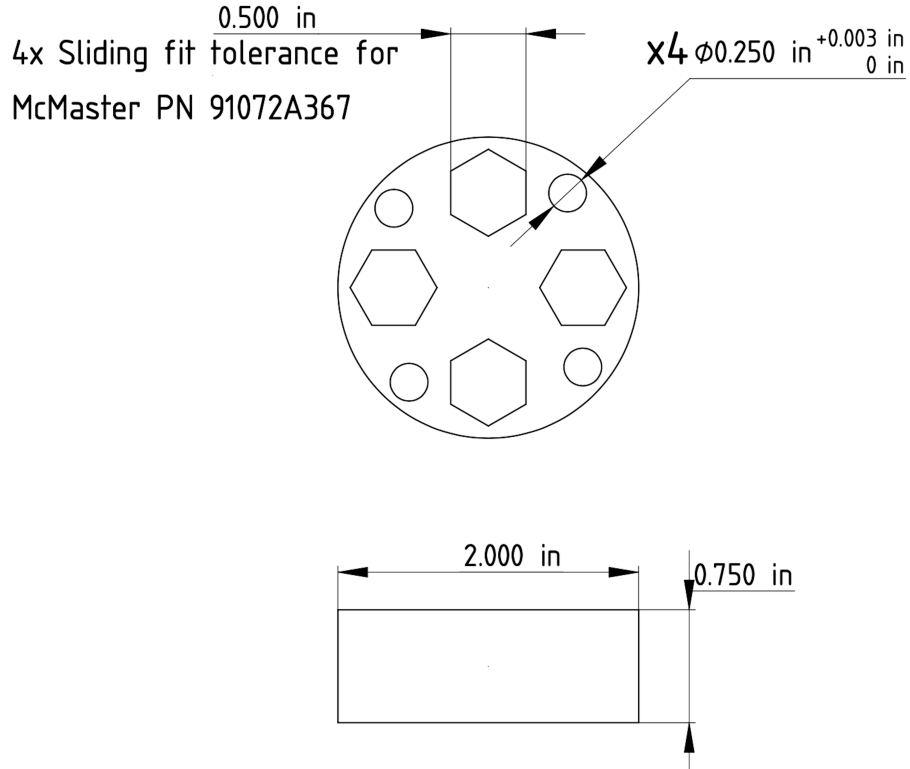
Engineering drawing of 6061 aluminum round of lower carousel. The 0.250" holes are same dimensions as of Figure B.6. Units are in inches.
